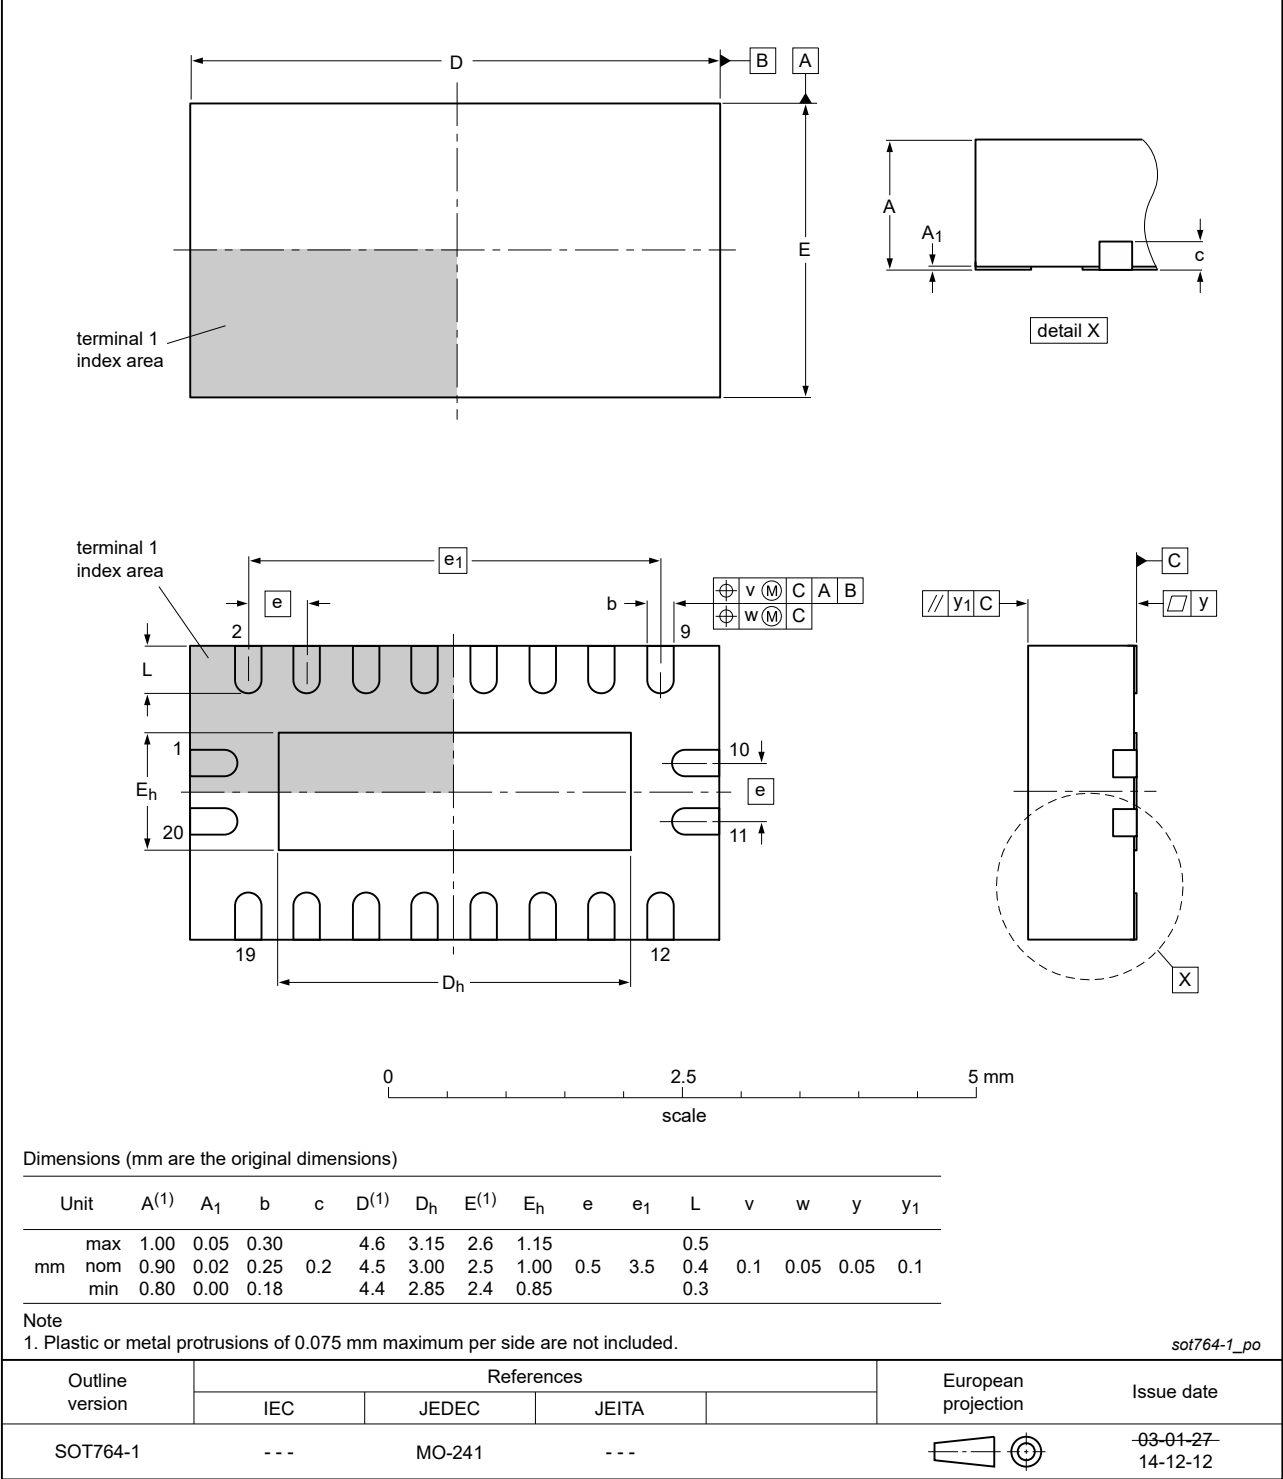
Package outline SOT764-1 (DHVQFN20)
